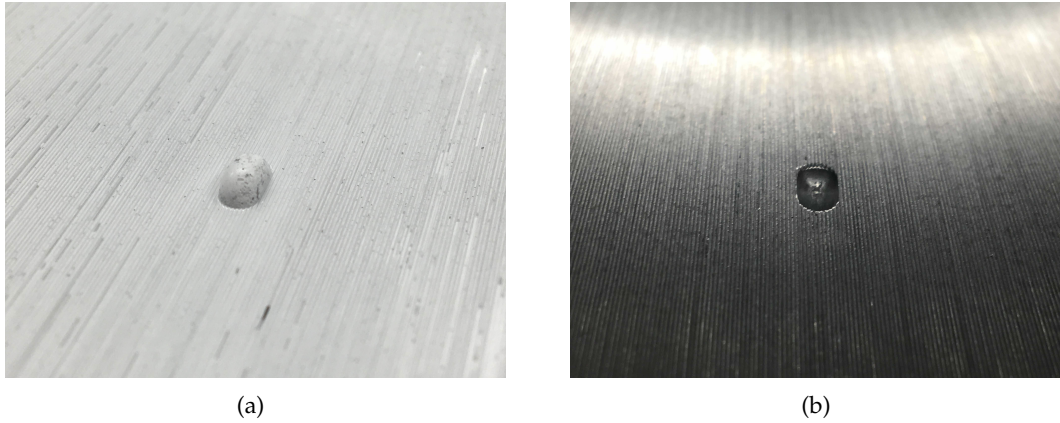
(a) Pin shape on a fibre mat and (b) pin hole in the winding wheel.
